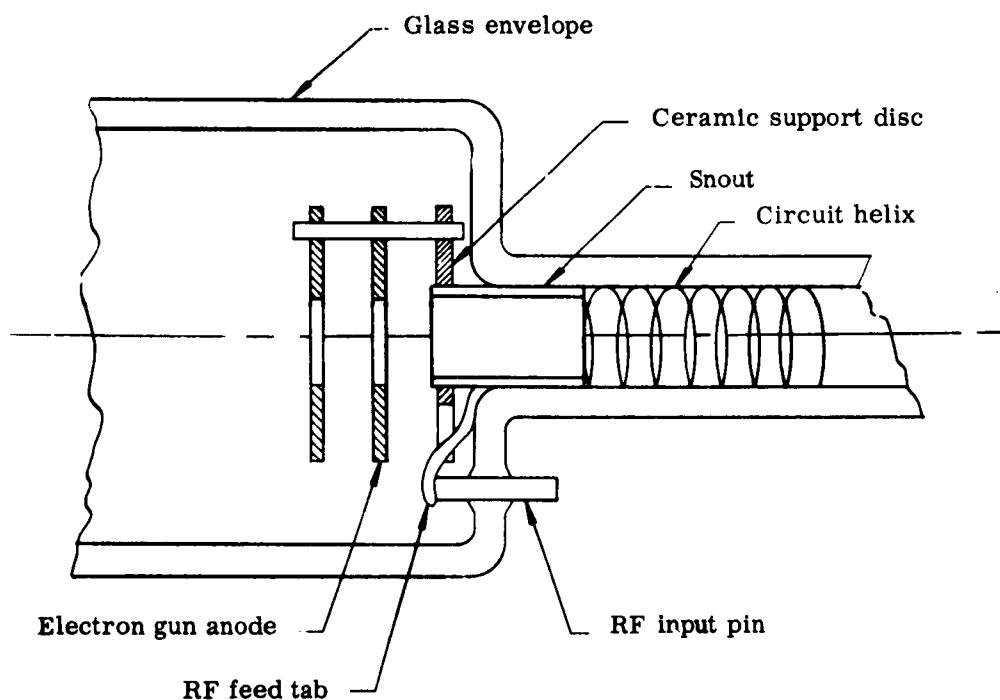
Sketch showing details of the pin-seal rf input match. The front end of the gun is supported by the ceramic alignment anode, which is notched to provide clearance for the input pin.
